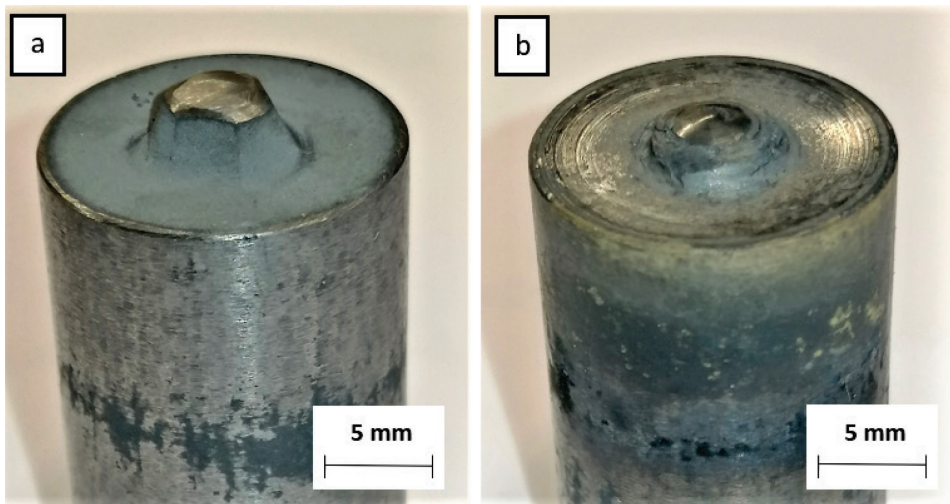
Image of the FSW tool (75TiC-NiMo) before (a) and after (b) welding of austenitic stainless steel.
